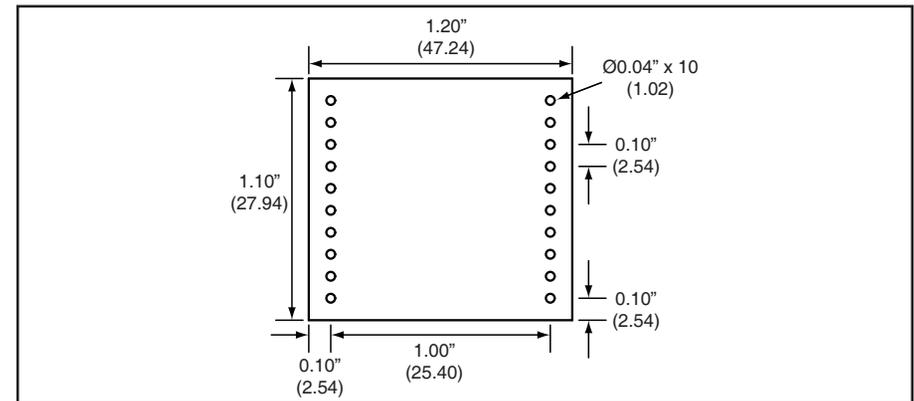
MDEV-GPS-SG-DB PCB Layout Dimensions
